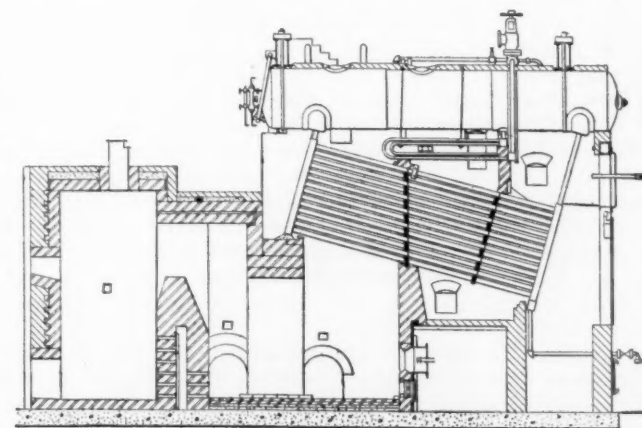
BABCOCK & WILCOX BOILER FITTED WITH HEARTH-TYPE FURNACE ARRANGED FOR SUPPLEMENTARY OIL BURNING WITH MECHANICAL BURNERS
